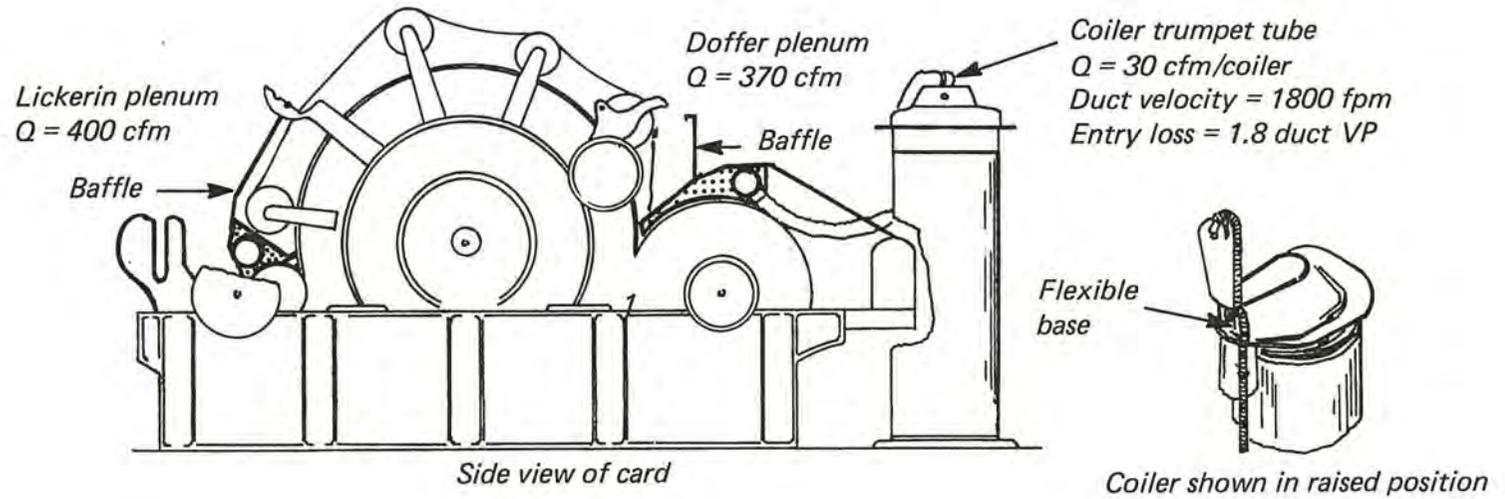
EXHAUST HOOD LOCATIONS ON A CARDING MACHINE
